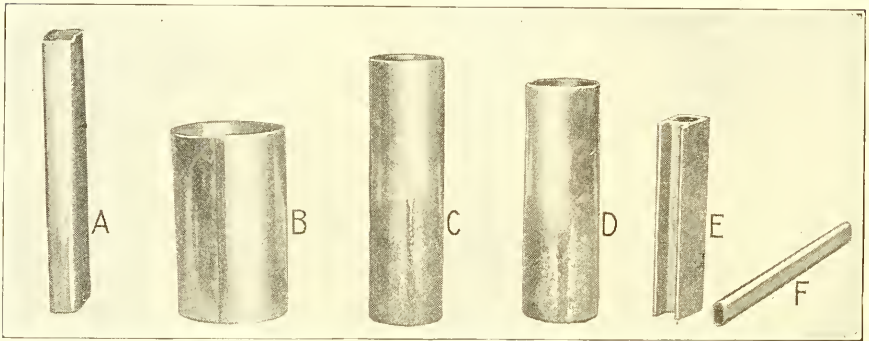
Samples of Tubing Welded by the Oxy-Acetylene Machine Welding Process.
